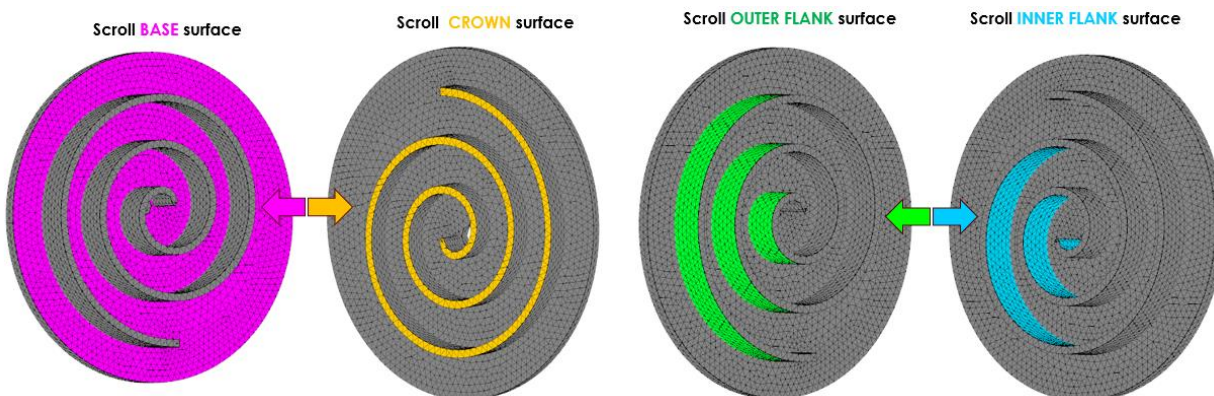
Pairs of surfaces in contact in two of the four scroll-to-scroll contact elements used for modeling flexible body contacts (crown-base and inner-outer flank are flipped for the other two)
